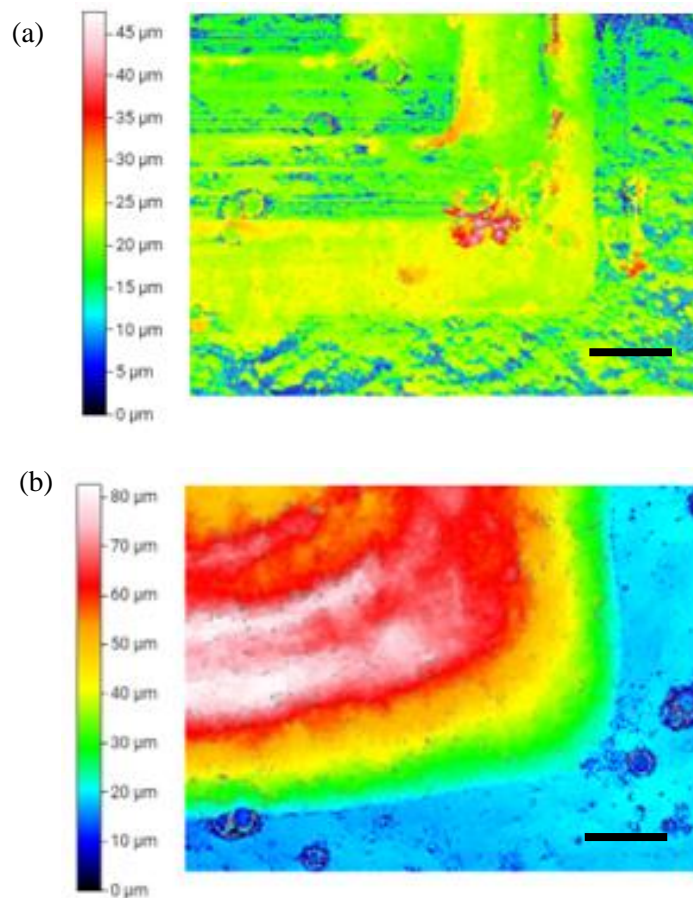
Bottom right corner of extrusion printed silver square on printer stage secured with (a) screws, and (b) vacuum. The scale bar indicates 100 μm.
